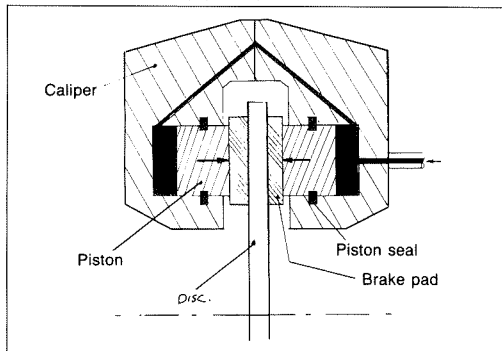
Hydraulic pistons in the caliper force the brake pads against the disc.
